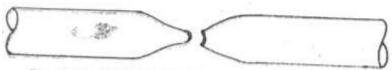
CUP AND CONE TYPE OF FRACTURE
